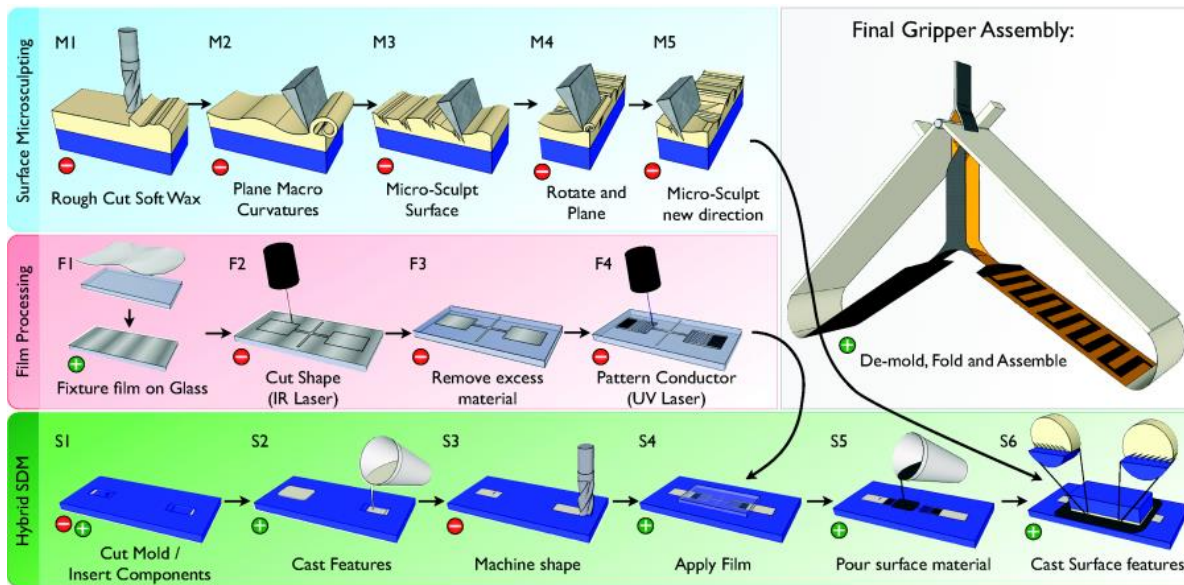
Non-3d printed sensor design involving multi-step fabrication Reproduced with permission, [207] Copyright 2015, American Society of Mechanical Engineers.
